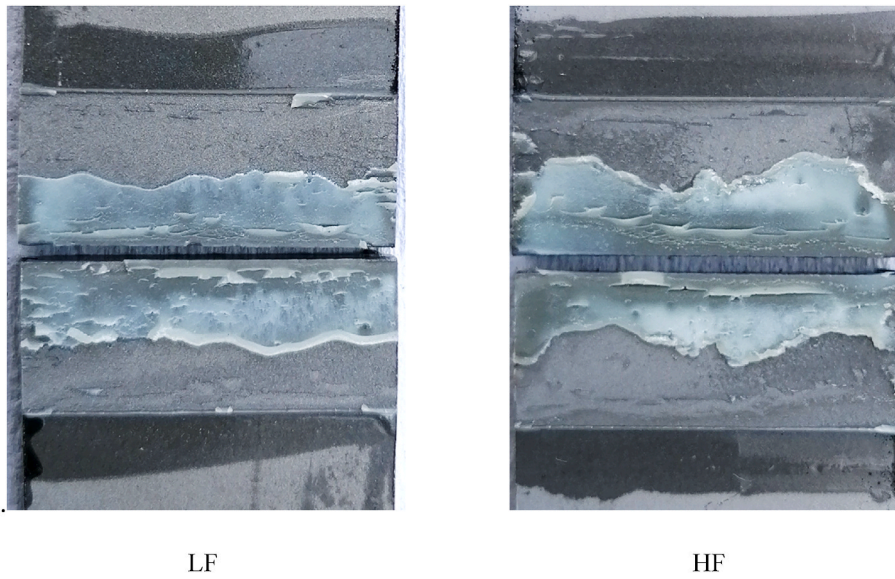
Example of fracture surfaces for SS joints, load ratio  $R = 0.4$ .
